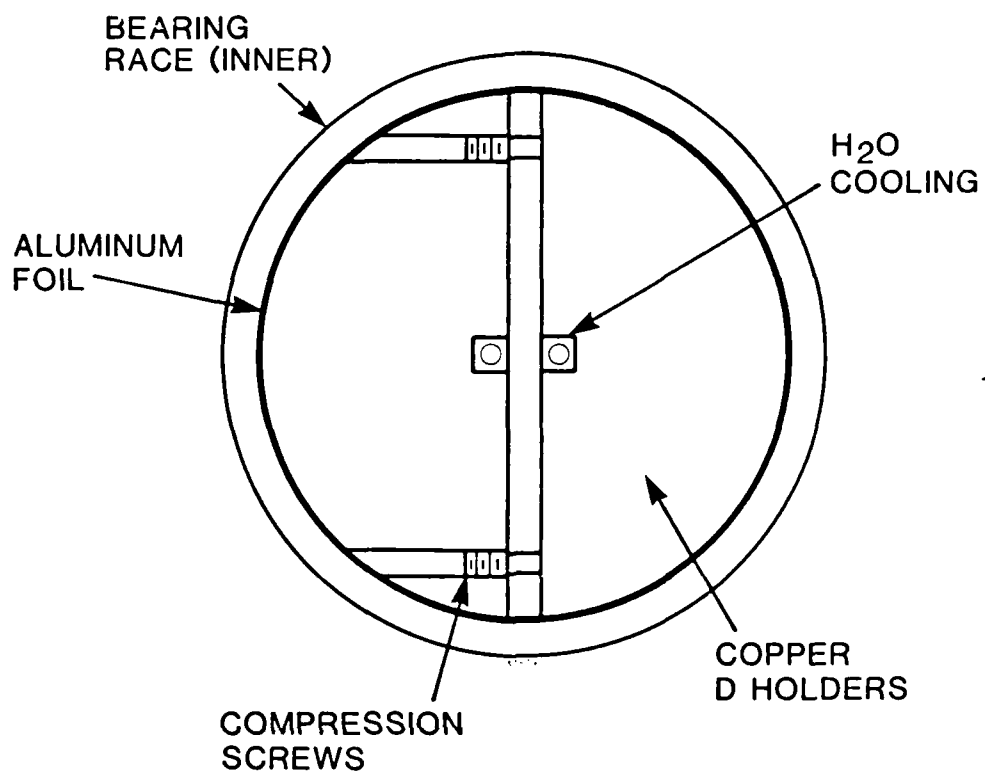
COOLED FIXTURE FOR H-46 INNER RACES (END VIEW).
